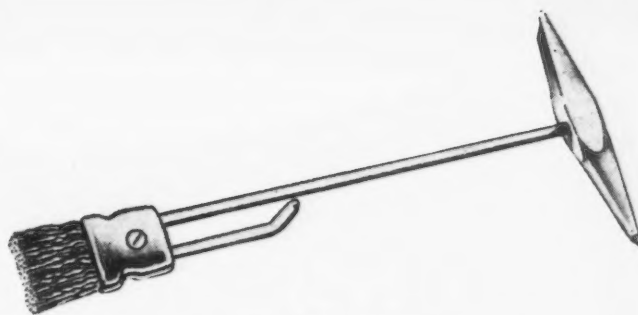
Chipping hammers of this type provide chisel and drift ends for reaching all parts of a weld and a stiff brush for removal of slag and loose particles.
